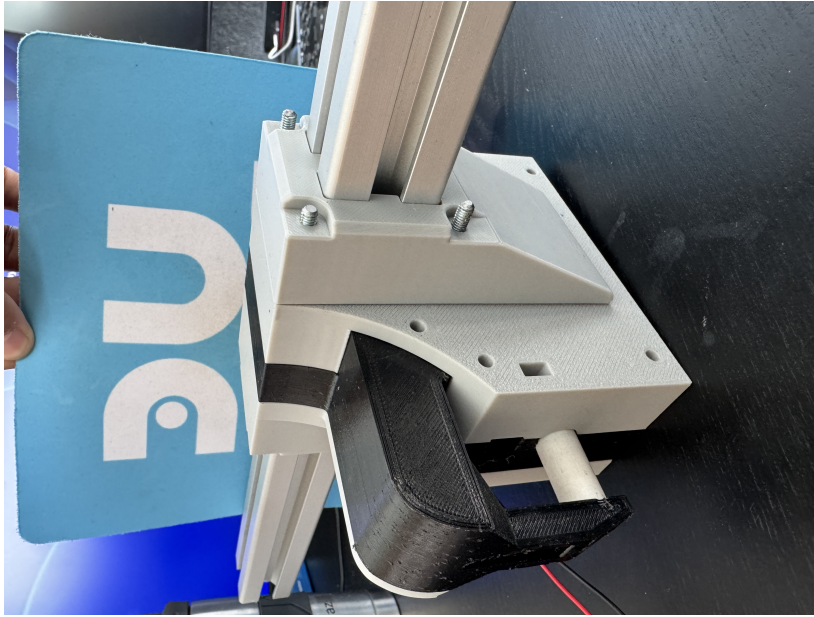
Fully assembled hook mechanism after joining all printed modules with screw fastening.
